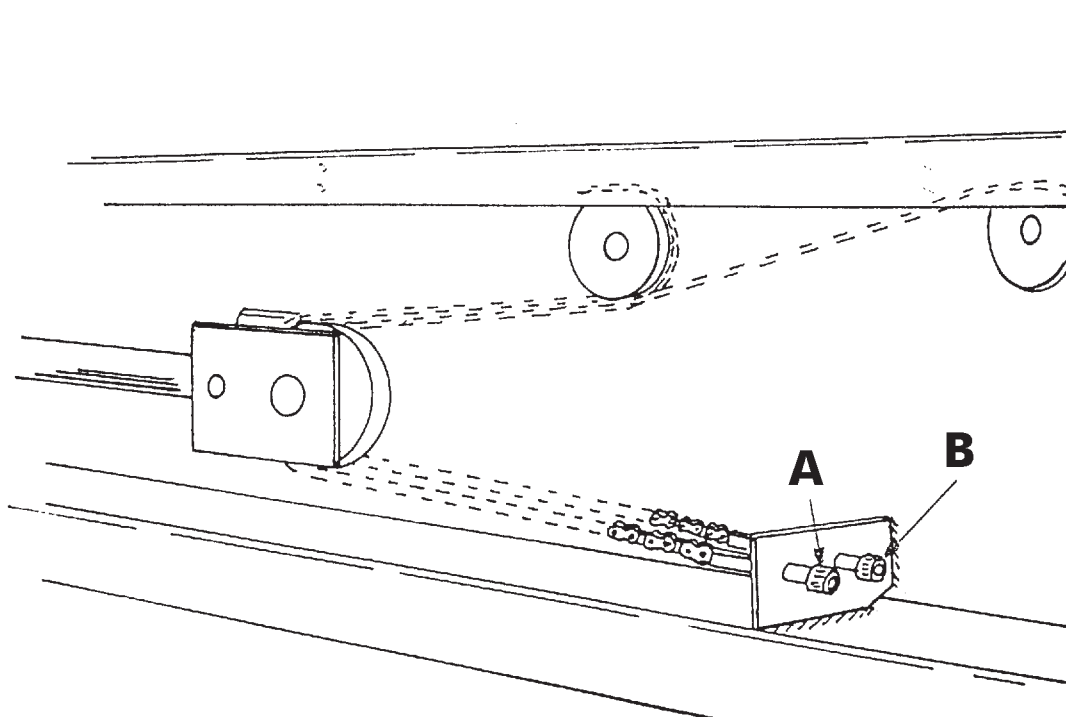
TABLE HEIGHT ADJUSTING DETAIL
